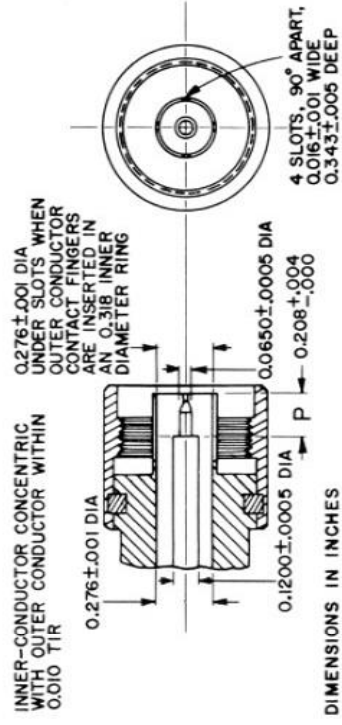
Recommended dimensions to mate Type 900-QNJ Adaptor.
